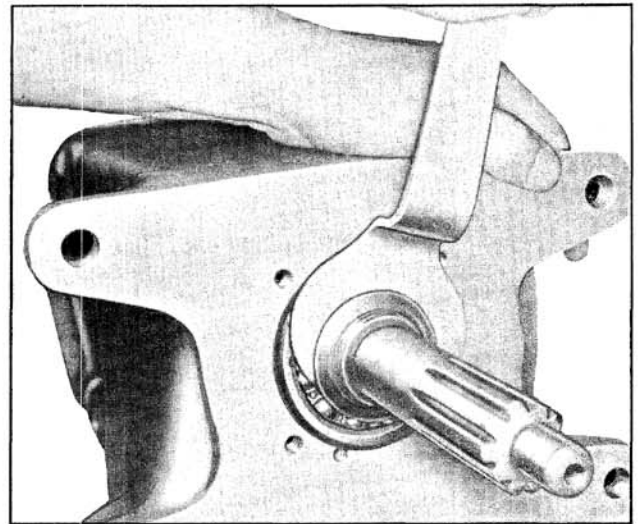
Removing Reverse Shifter Shaft Lock Pin
